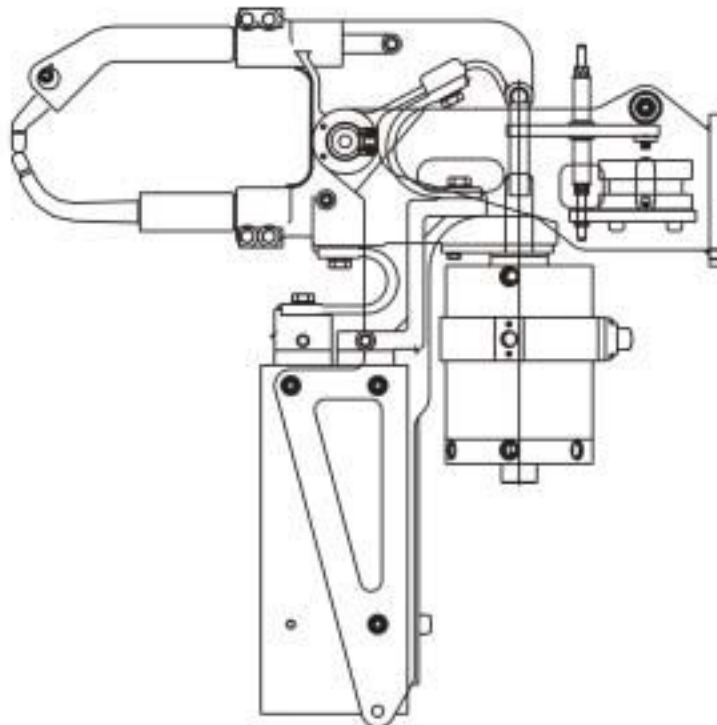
Robot Style, Scissor-Type Gun w/Transformer
